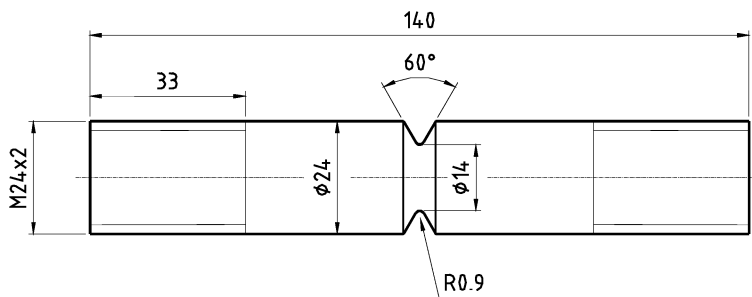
Sketch of fatigue tension test specimen with $d_{min} = 12.00$ or 7.00 mm.
